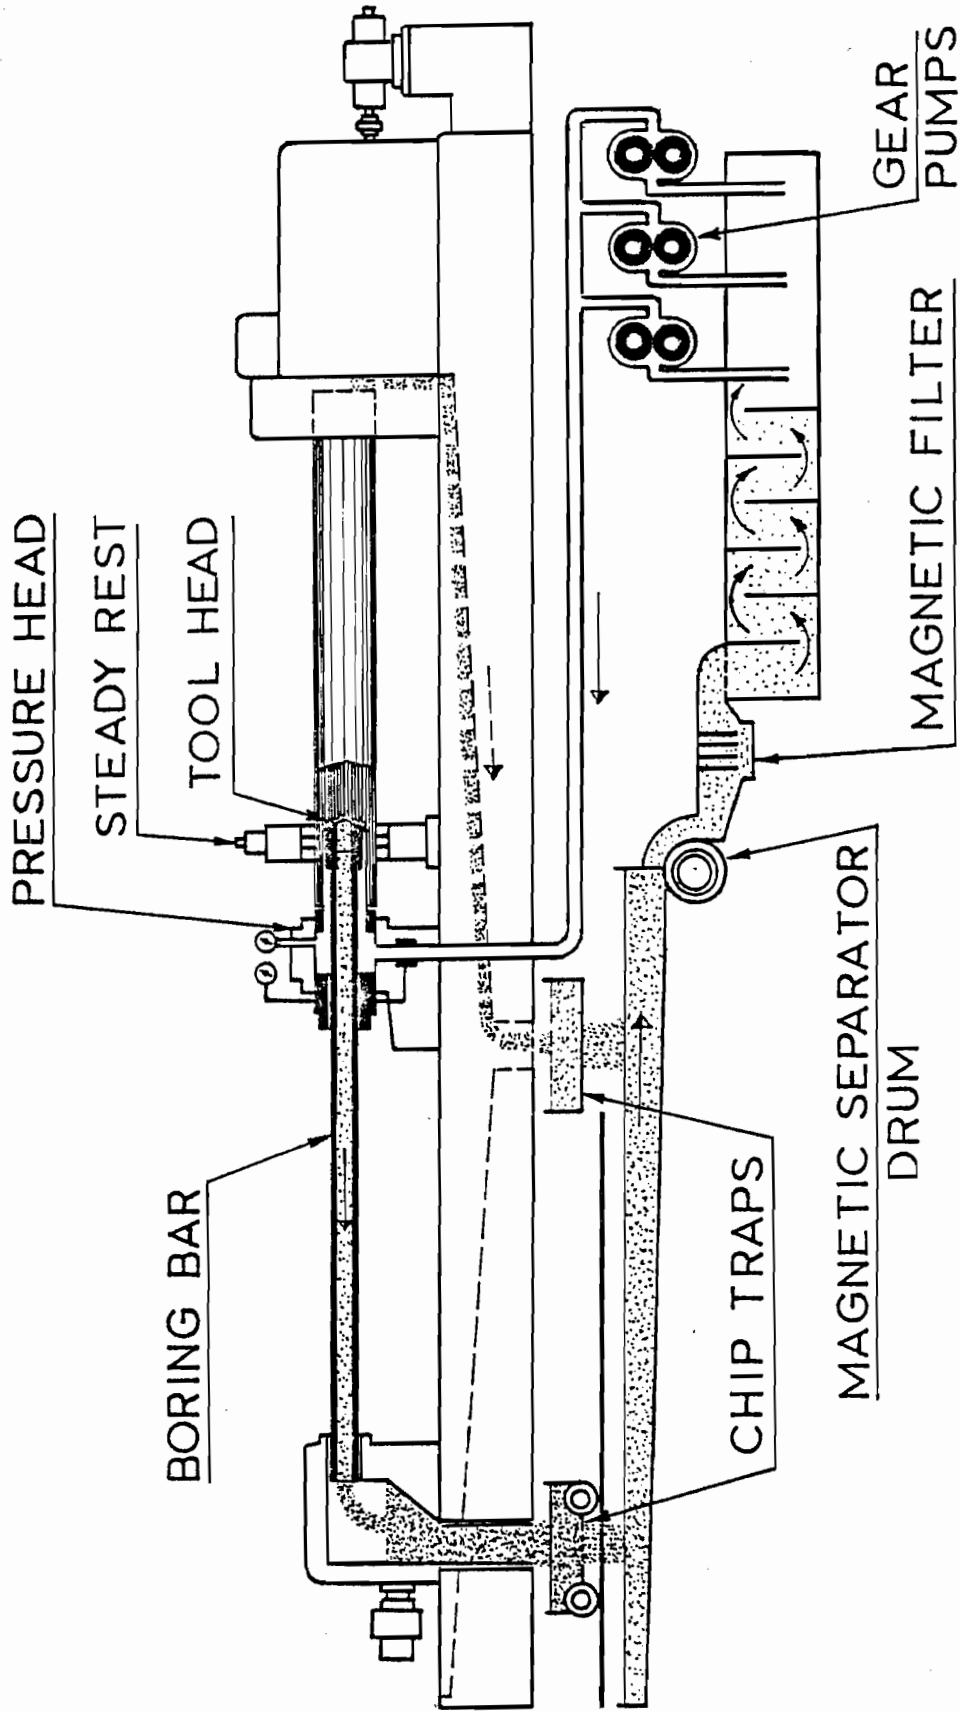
THE PRINCIPLE OF BTA DEEP-HOLE MACHINING
